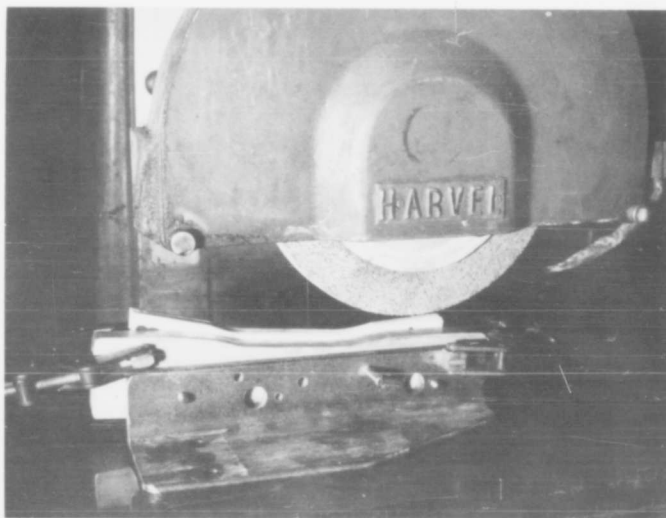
Tensile Specimens Ready for Grinding Paper on Gripping Area
